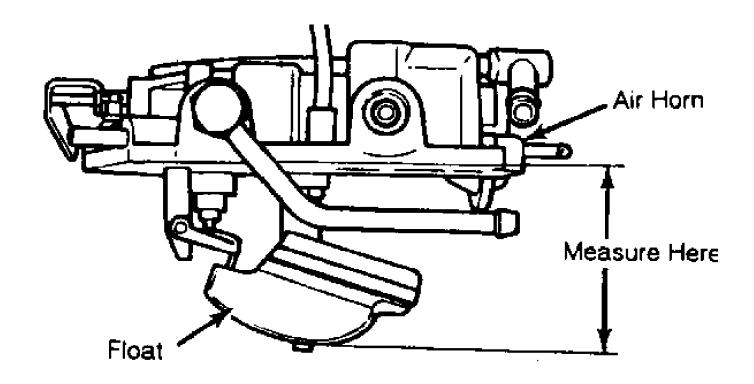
Adjusting Float Drop Courtesy of Mazda Motors Corp.
